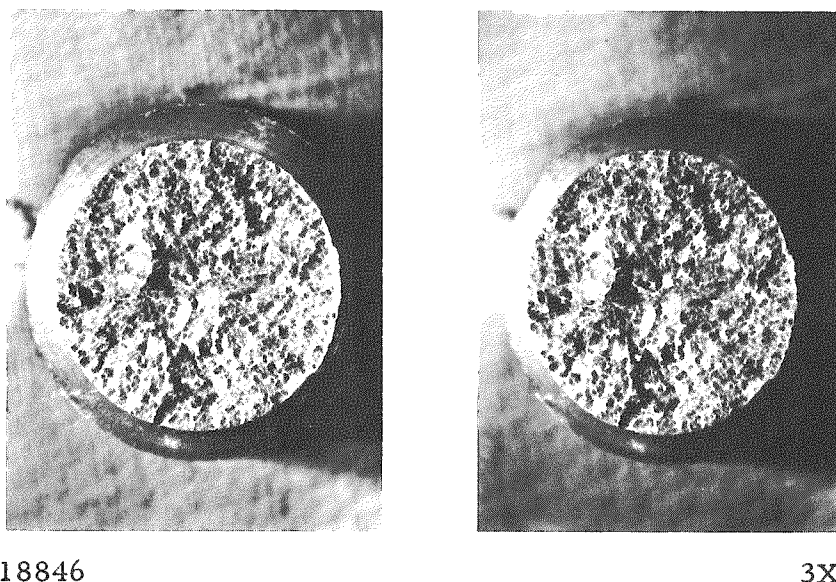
Fracture surfaces of specimen No. AC-66.
